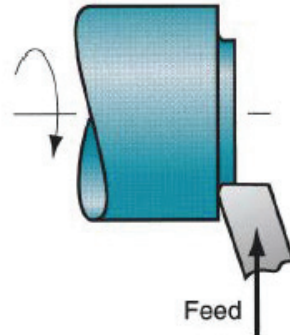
The face turning process achieved by a single-point tool that moves perpendicular to the axis of a rotating work piece. Figure from [195].
